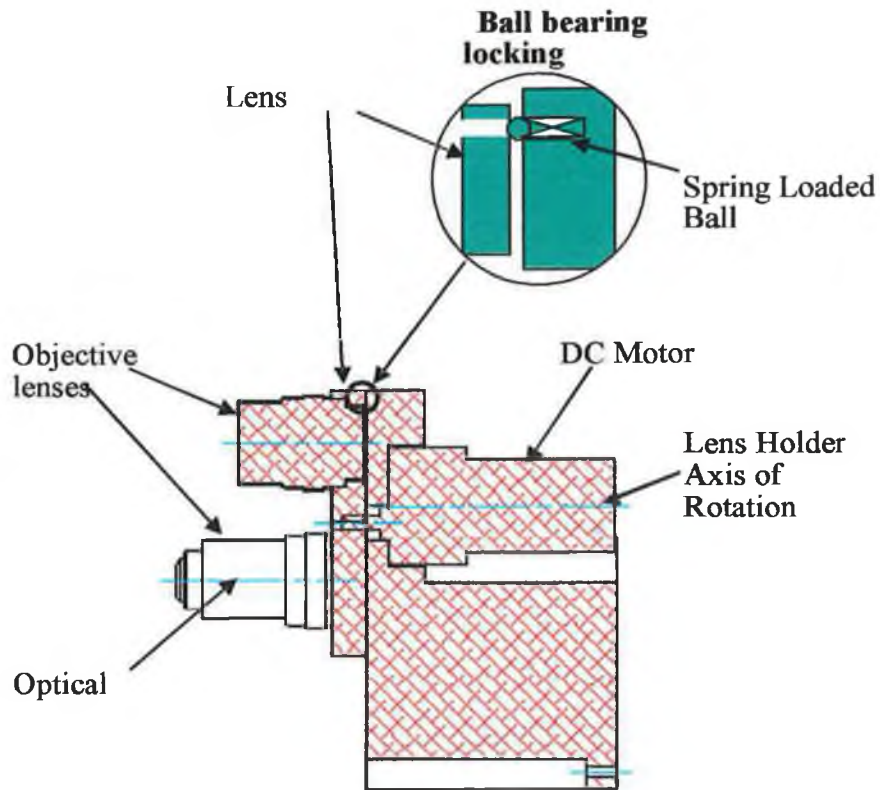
Cross sectional drawing (Through optical axis) of lens rotation mechanism. Spring loaded ball bearing positioning system is used to position the lens concentric with the optical axis.
